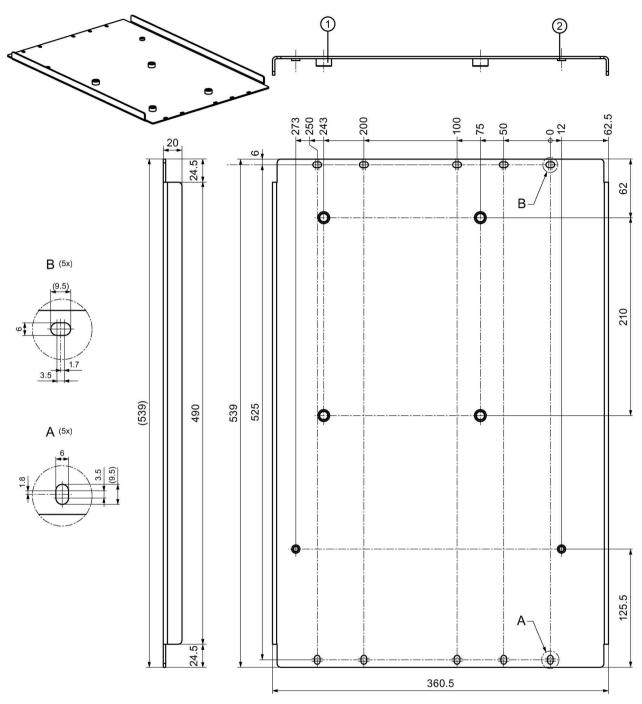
Mounting plate for a 600 mm wide Rittal TS8 control cabinet
